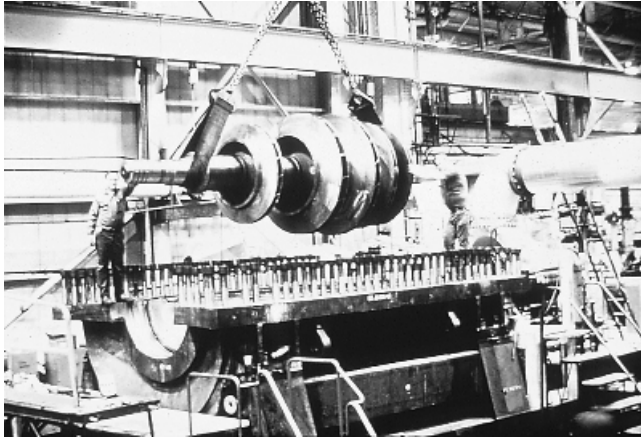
Compressor rotor installed in a horizontally split centrifugal compressor. (*Dresser-Rand Company, Olean, N.Y.*)
